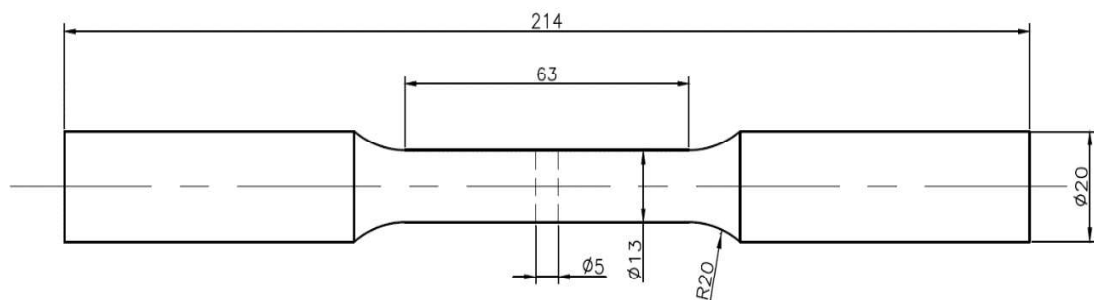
Shape and dimensions of SAE 1045 solid cylindrical specimen with transverse circular hole. All dimensions are given in mm.
